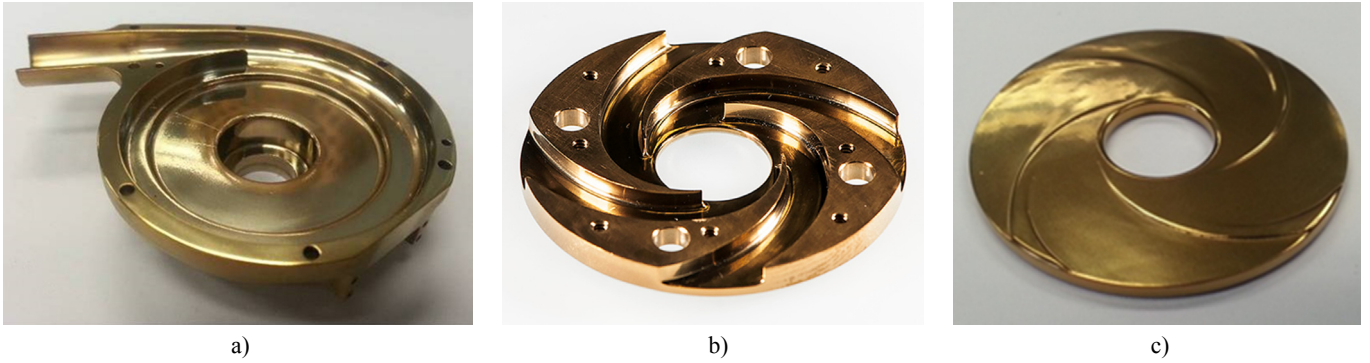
ReligaHeart ROT device elements with TiN layer modified surface: a) pump house; b) half of impeller core with blood flow channel; c) impeller cover with blades of hydraulic bearing
